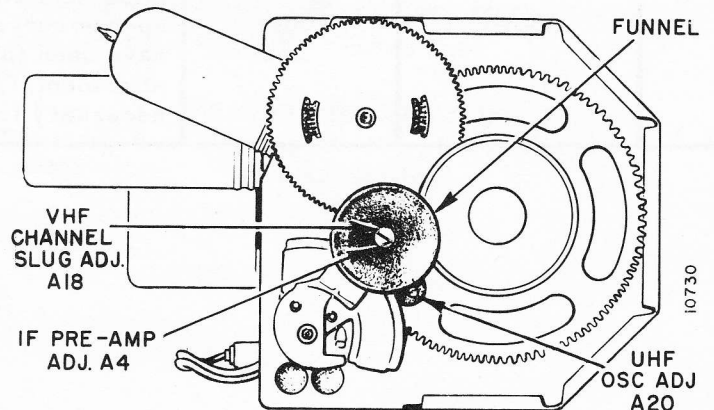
Front View of VHF-UHF Tuner Showing Adjustment Locations.
